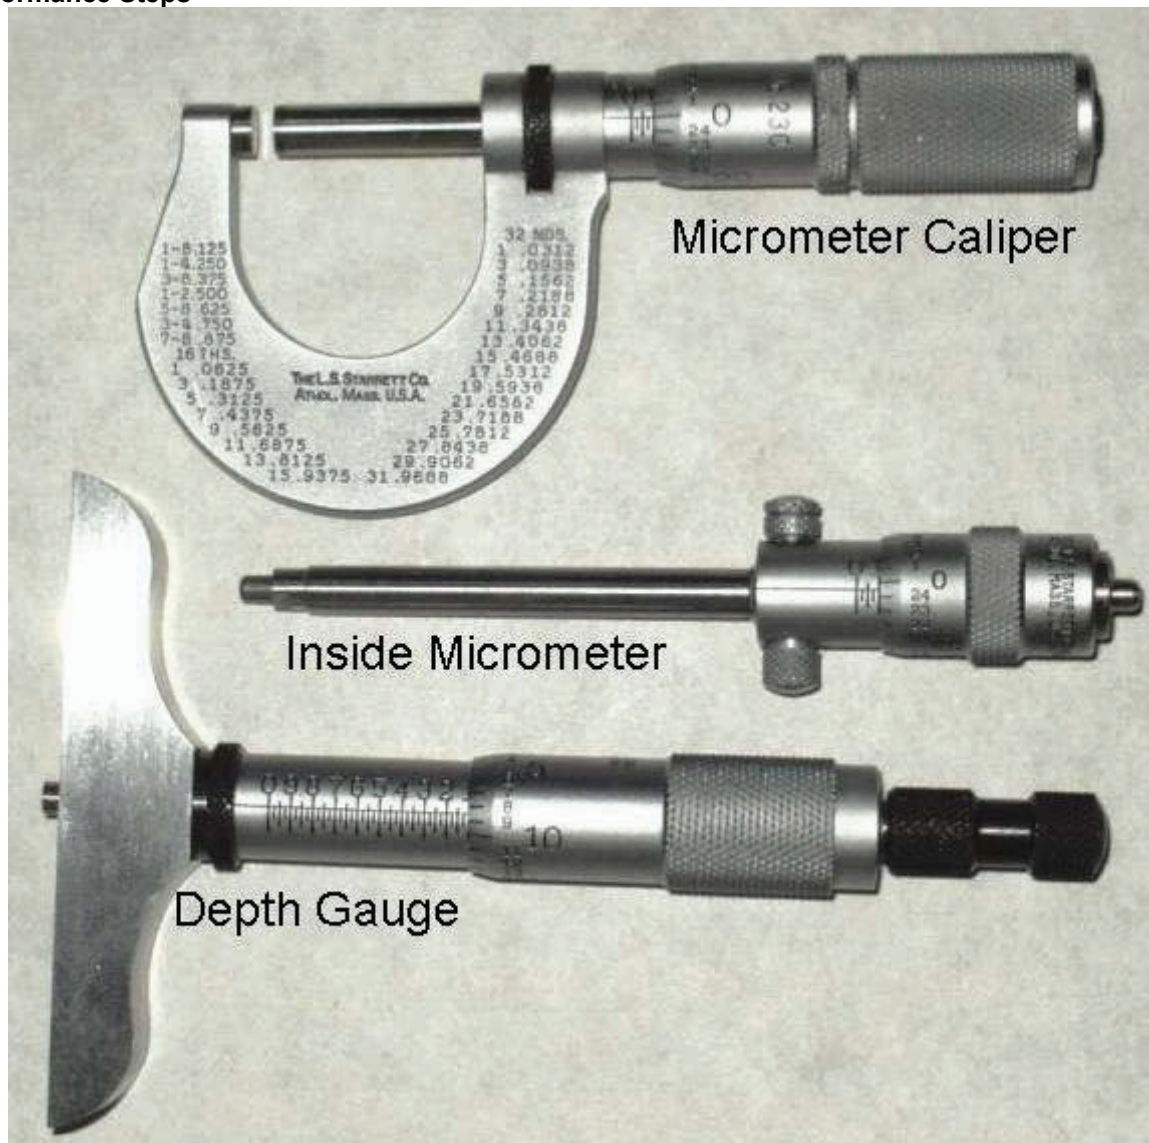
Caliper, Inside Micrometer, and Depth Gauge
